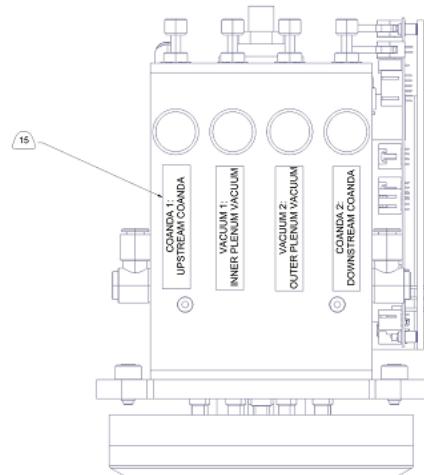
Laser Caliper Sensor CAL-module Assembly (3 of 5)
